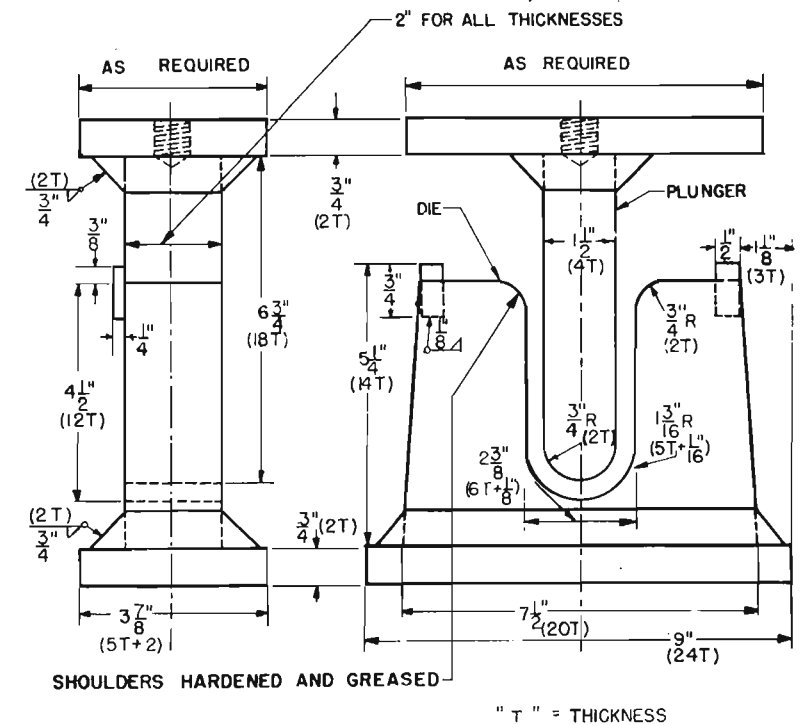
Die and plunger for guided-bend test of butt welds.
